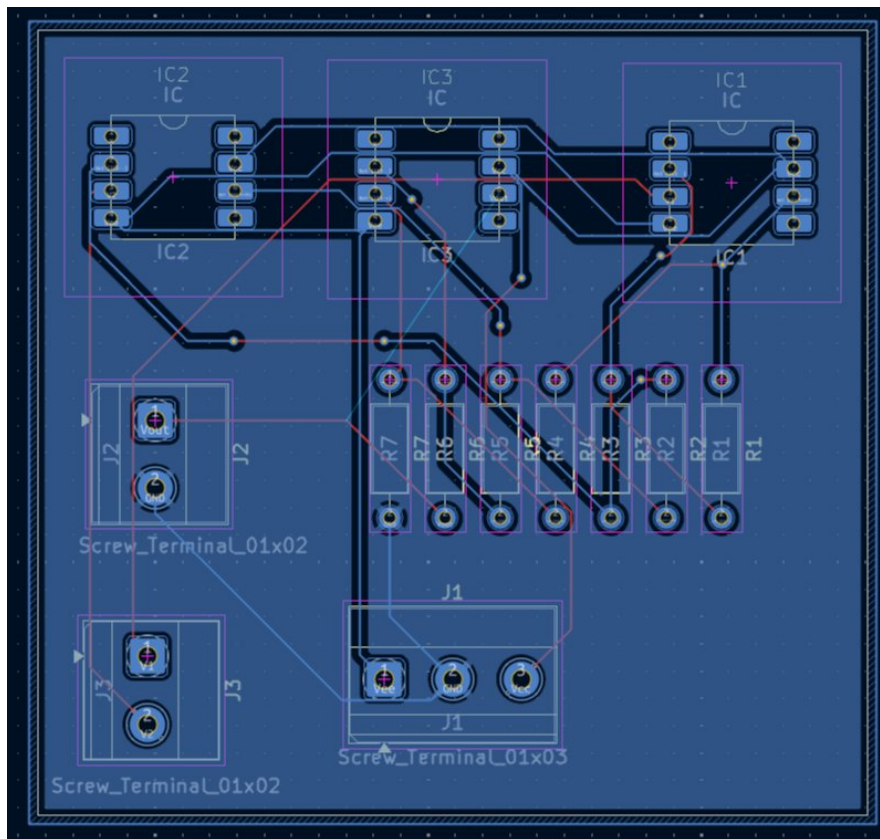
PCB Layout after DRC with Routed Tracks and Zone-Fill
